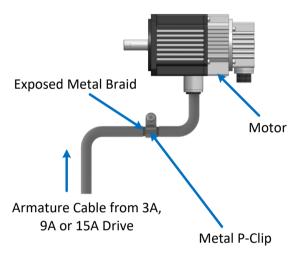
Armature Cable Shield Termination with Metal P-Clip at Motor End
